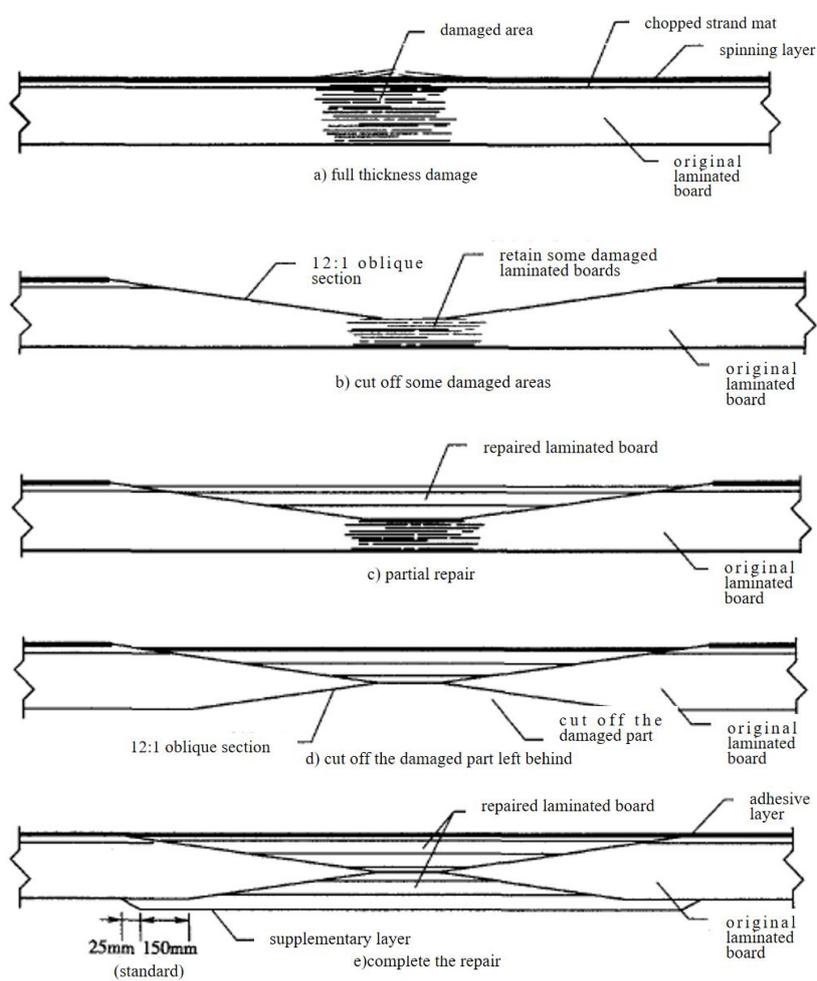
(4) Repair using the damaged part as a backing pad
